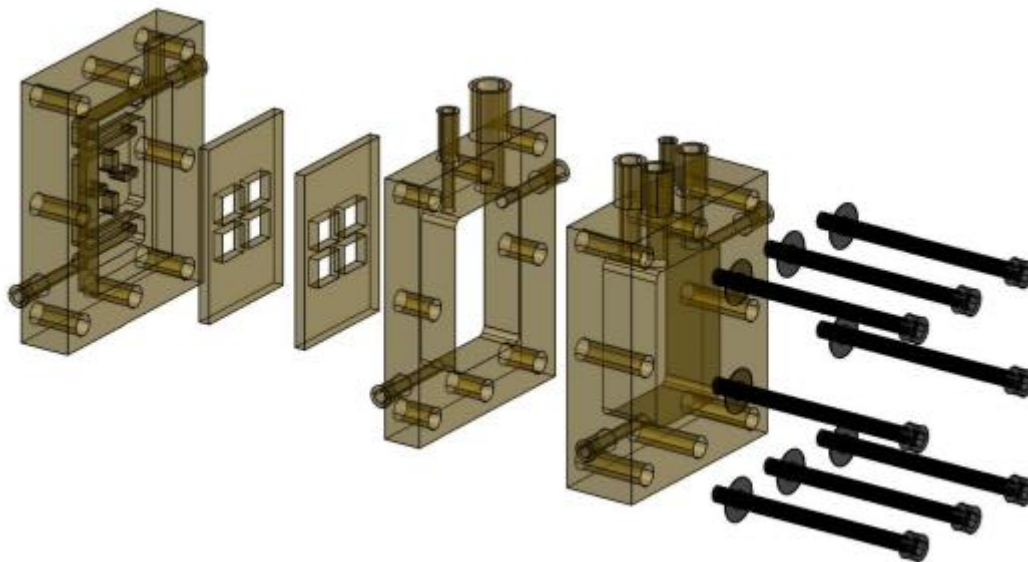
3D drawing of 3D printed acrylic pieces designed by Hang Xiang.²⁰²
